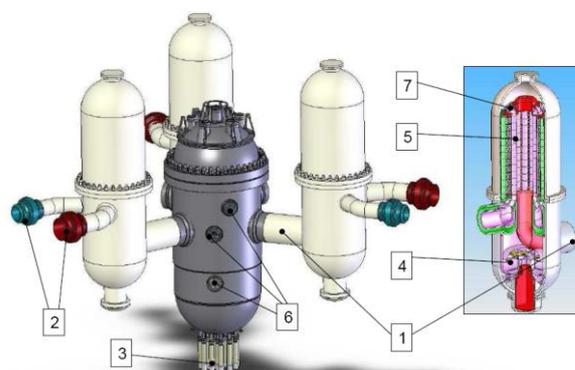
GFR reactor pressure vessel and IHX vessels (and exploded view of one IHX – blower unit)
